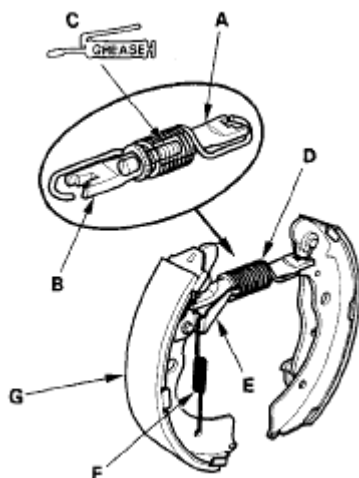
Identifying Brake Shoe Ends And Edge Of Shoe Surface
